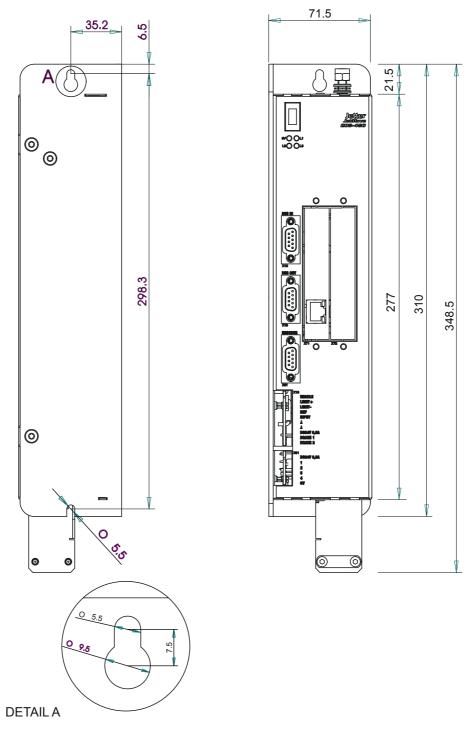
Rear and front view of the JetMove 204-480 enclosure with mounting holes
